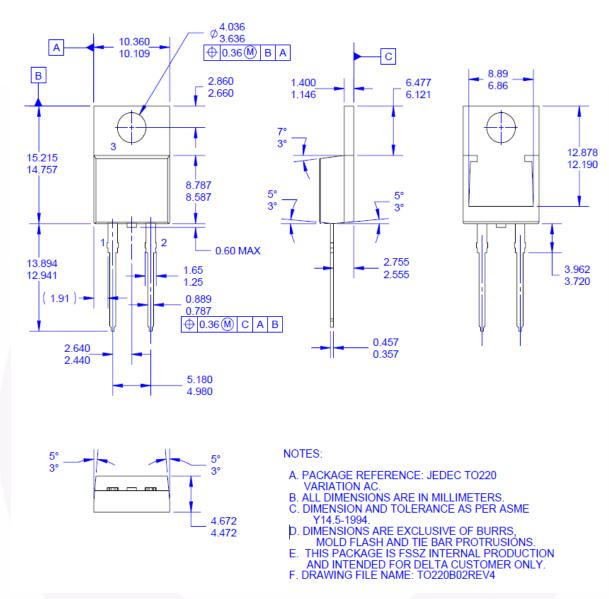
TO-220 2L - TO-220, MOLDED, 2LD
